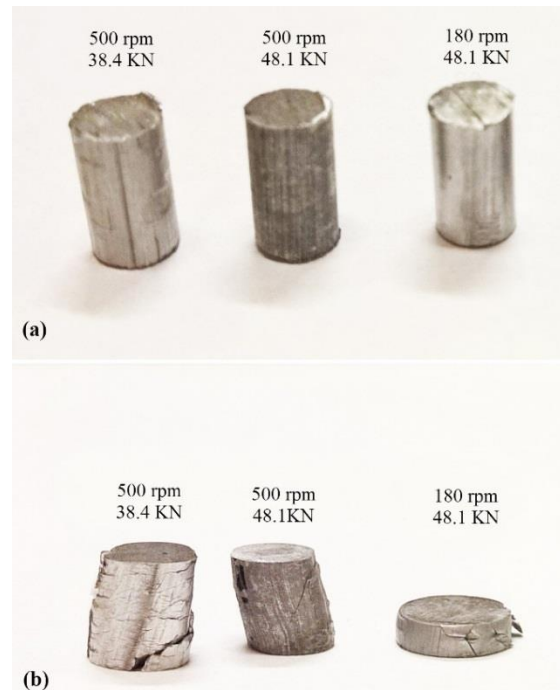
The image of cutted samples a) before compression test b) after compression test
